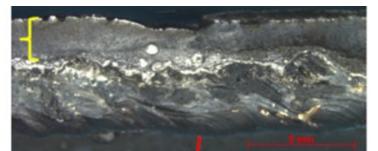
Stereomicroscopic image of the fracture surface on the left side of the middle part of the control arm. The thickness of the weld is indicated with yellow brackets in the images. Image: Element Materials Technology AB.
